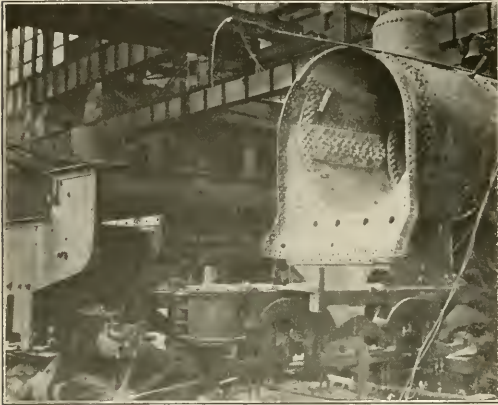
View Showing Boiler Back End Removed for Application of New Firebox
